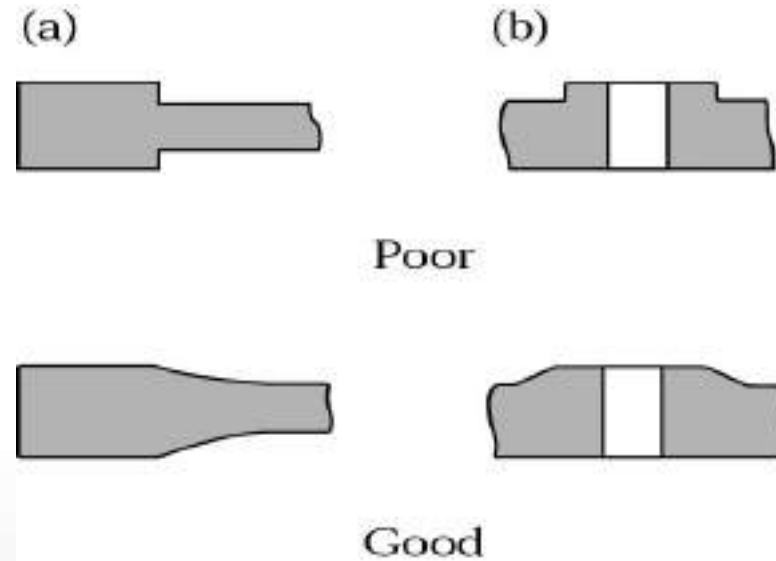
Suggested design modifications to avoid defects in castings. Note that sharp corners are avoided to reduce stress concentrations.
